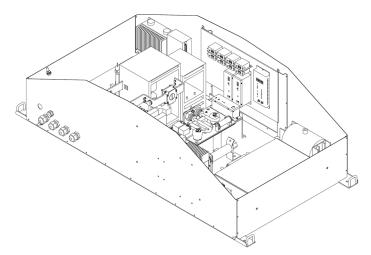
View of circuit breaker DCU-800MNL after removing the top cover [2].
